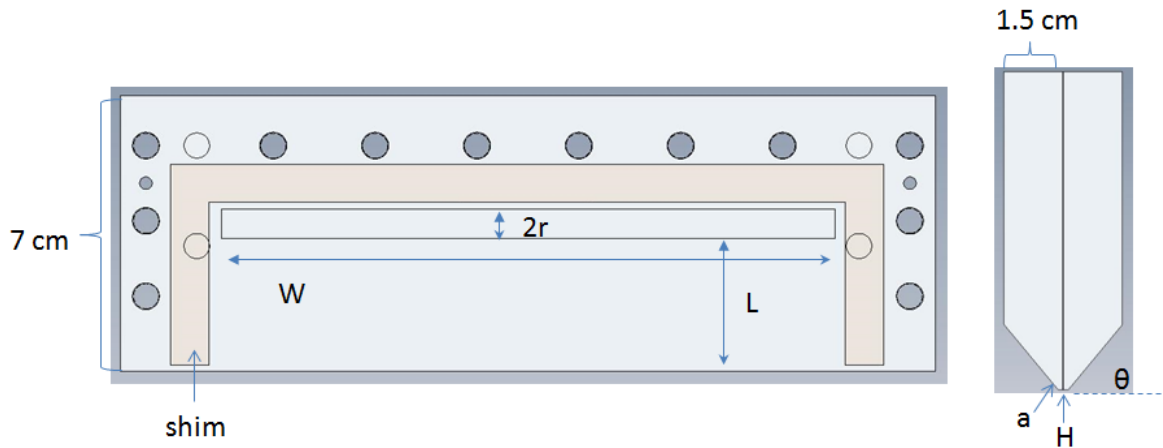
Outline drawing of slot die head (drawn in Solid Work by Dr. Dufei Fang)
